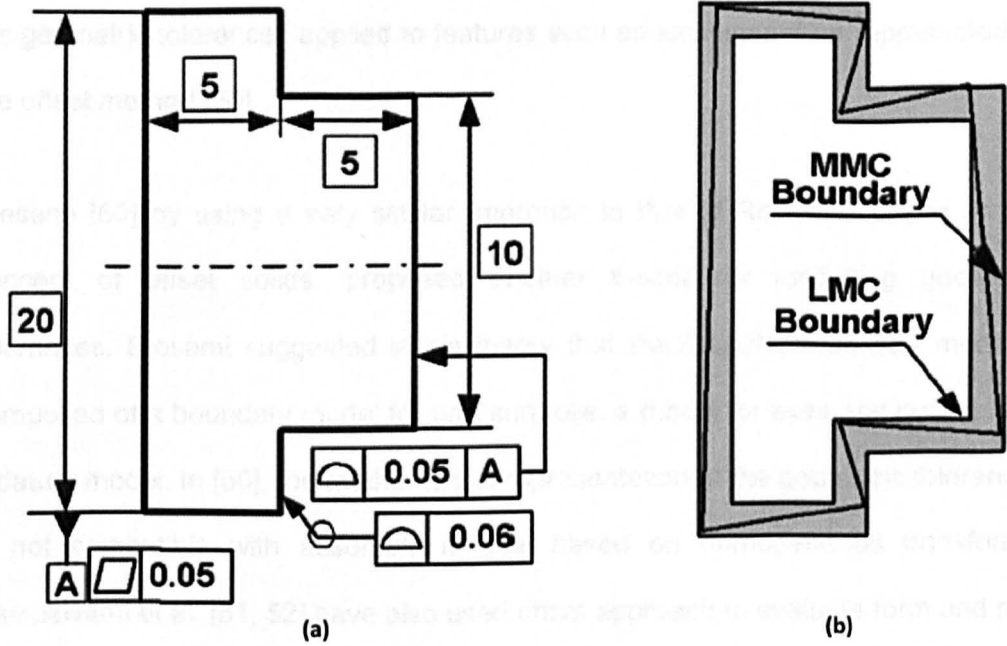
(a) A part with geometric tolerance callouts, (b) An instance of the actual part that is acceptable as per specification provided in (a) [46].
